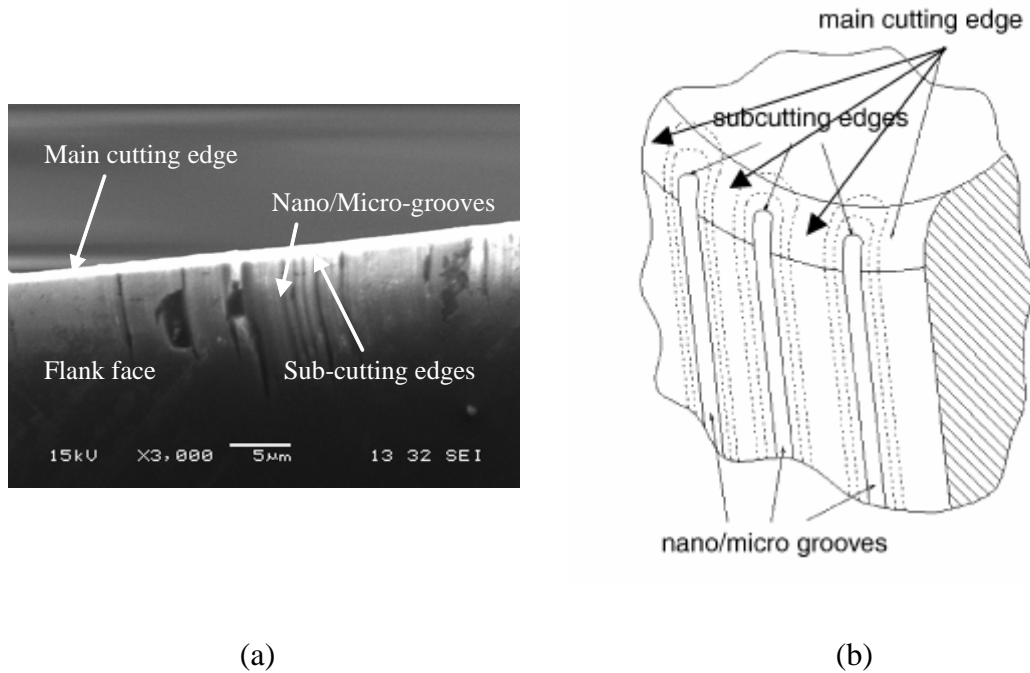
(a) SEM photographs of the tool flank face after ductile mode cutting, showing micro/nano grooves on the diamond tool flank face; (b) Sub-cutting edges of much smaller edge radii formed on the main cutting edge by the micro/nano grooves at the tool flank.
